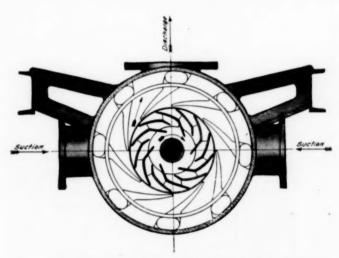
Sectional View of One Stage of Pump Showing IMPELLER AND DIFFUSION VANES
